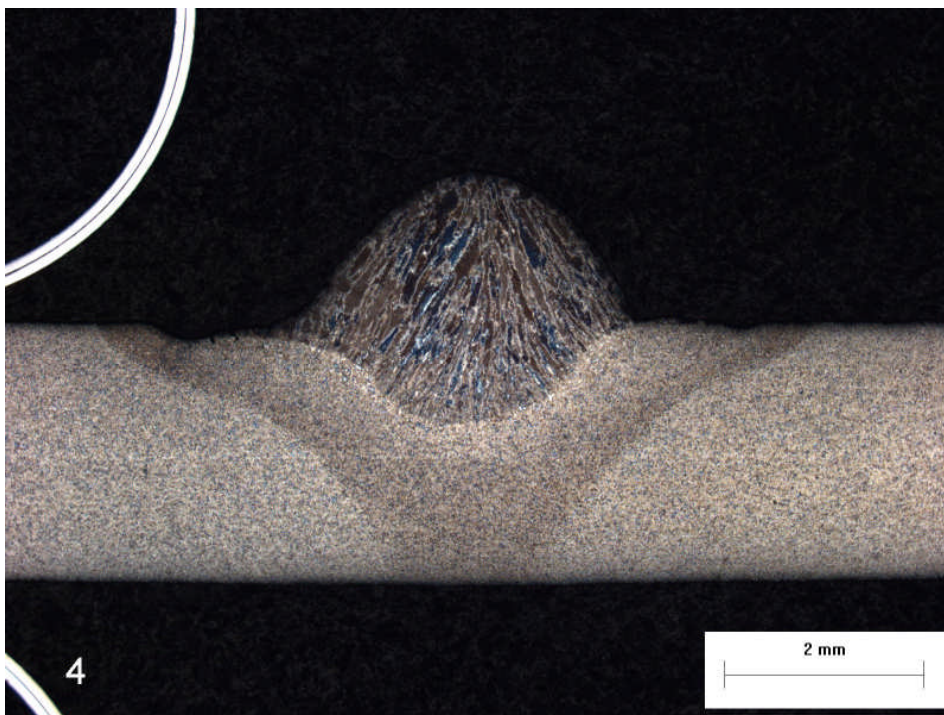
BOP Weld Made Using a Single-Spot Laser at 3.3-kW and 3.0-m/min TS on 2.4-mm Sheet
